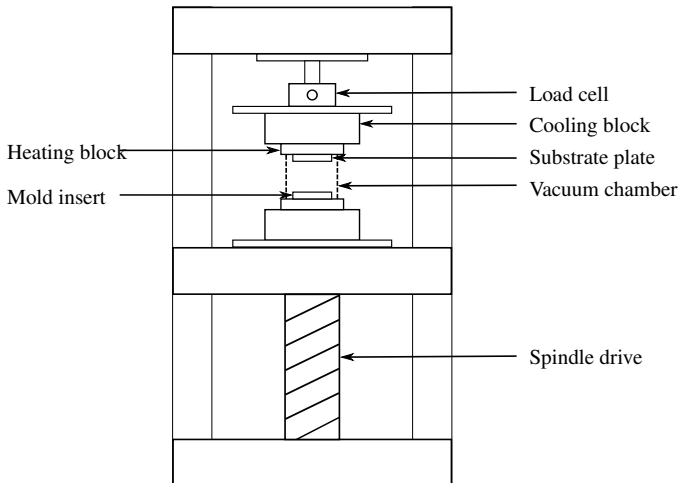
Hot embossing setup consisting of a substrate plate and a mold insert connected to heating plates, and cooling blocks. Mounted in a stiff embossing machine with precise motion, force and temperature control. (modified after Worgull⁶⁸)
